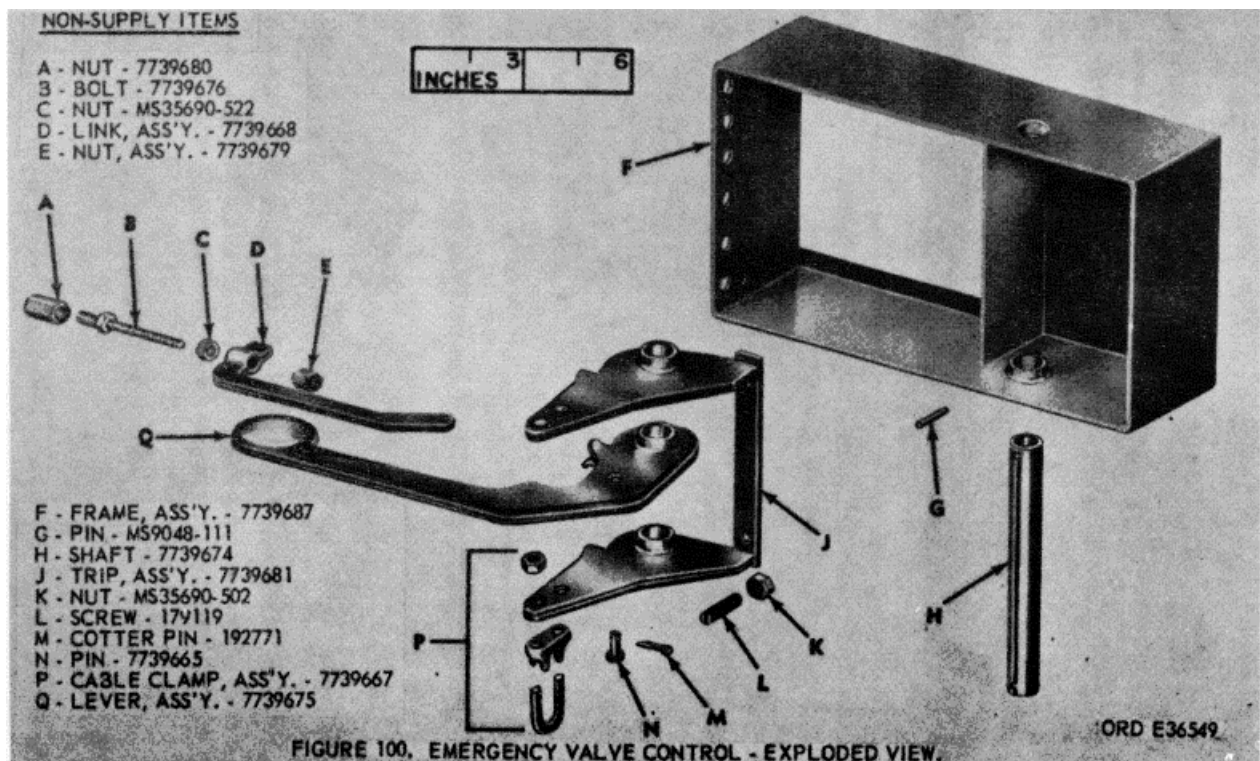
EMERGENCY VALVE CONTROL - EXPLODED VIEW.
